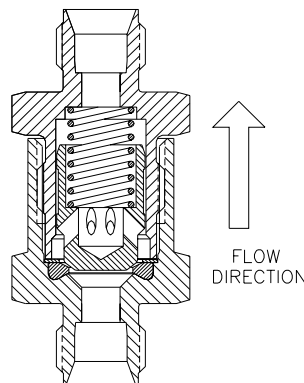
C Series Check Valve with PTFE Seats Cross Sectional View
